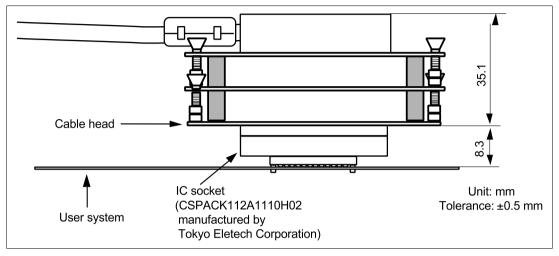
Resulting Dimensions after Connecting User System Interface Cable
